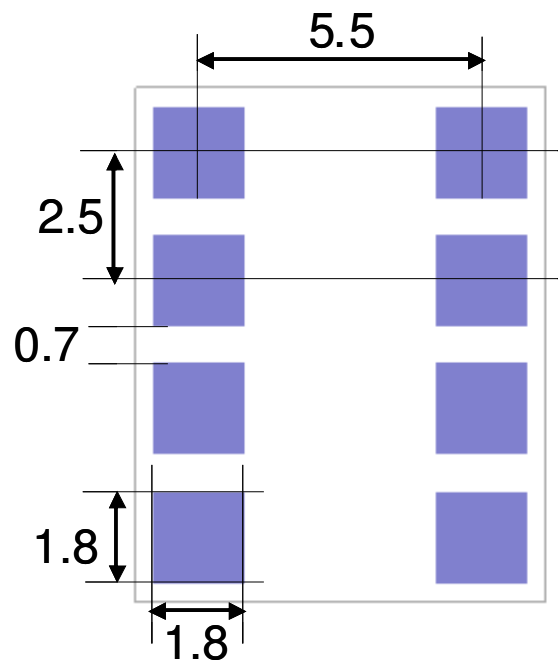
Recommended PCB footprint. Package size is 8mm x 10mm. Dimensions are in millimeters.
